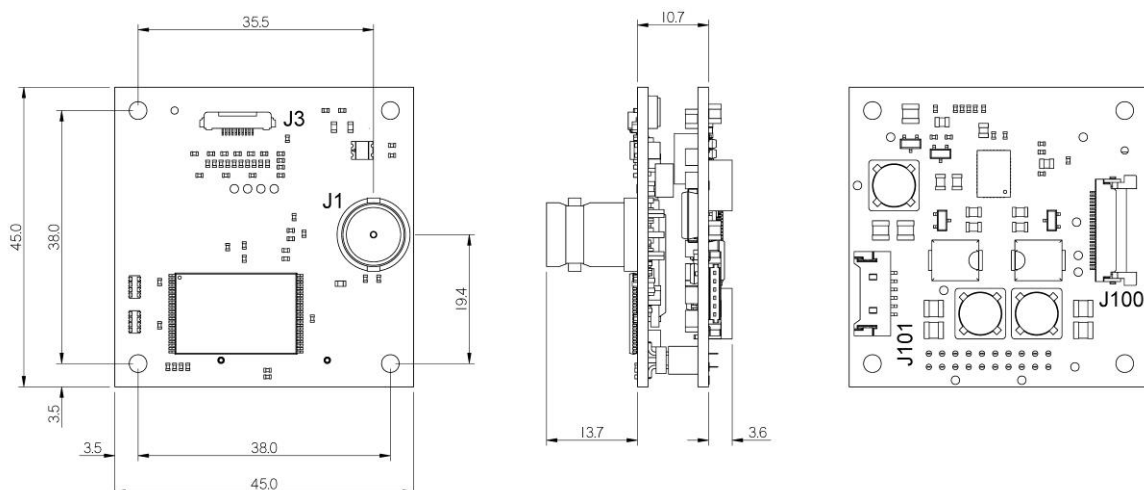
PCB Mechanical Details (Top, Side and Bottom)
